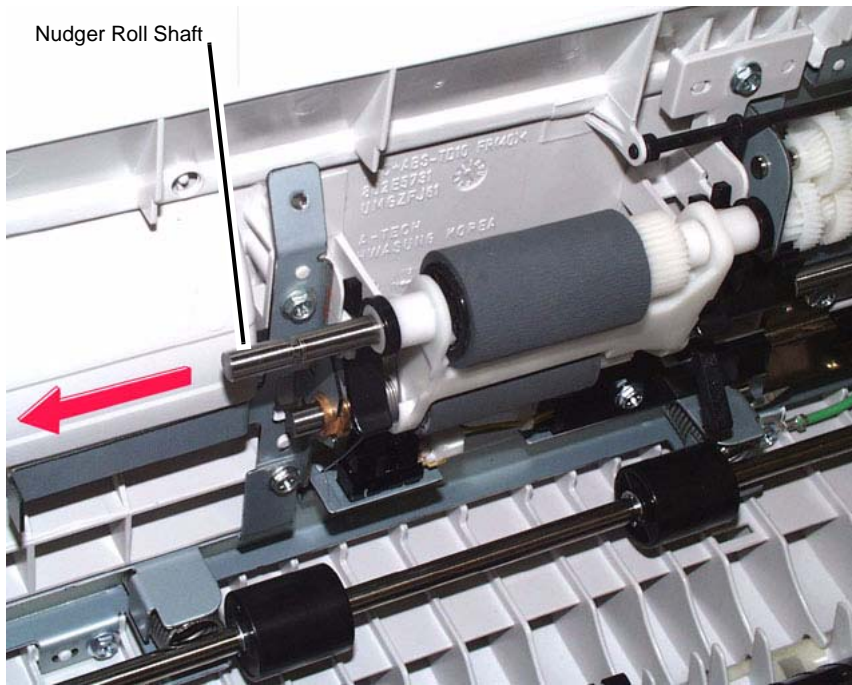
Removing the Nudger Roll shaft and the Nudger Roll
